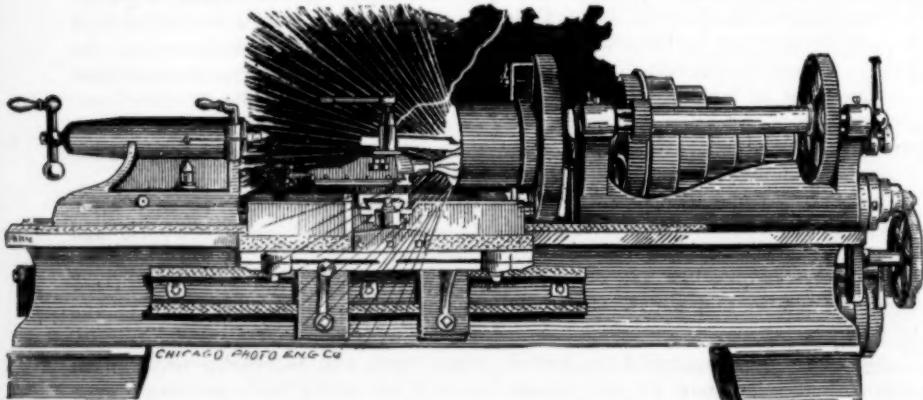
SHOWING HOLDER ATTACHED TO LATHE.
